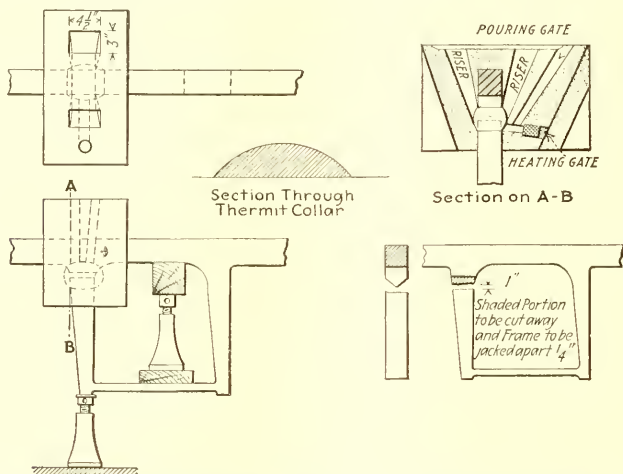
Method Employed in Welding Locomotive Frame Broken in Leg.
